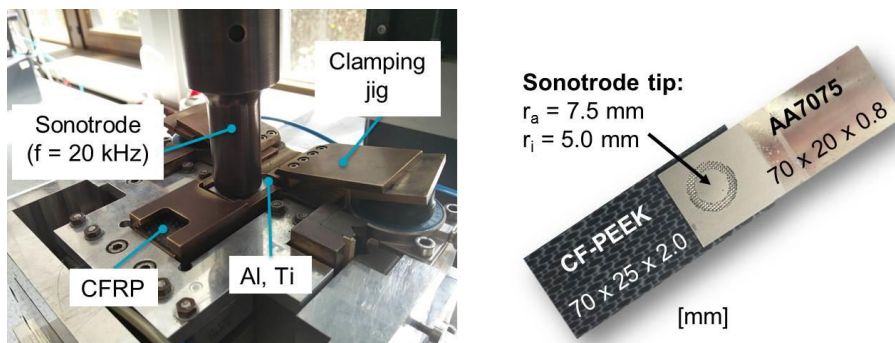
Used ultrasonic torsion welding system and torsion welded Al/CFRP-joint
